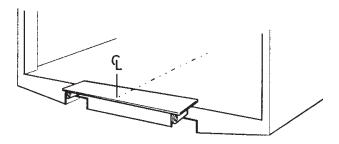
Bolt or spot-weld the mounting jig to the rear beam part. no. 60536 for Z 10-135
